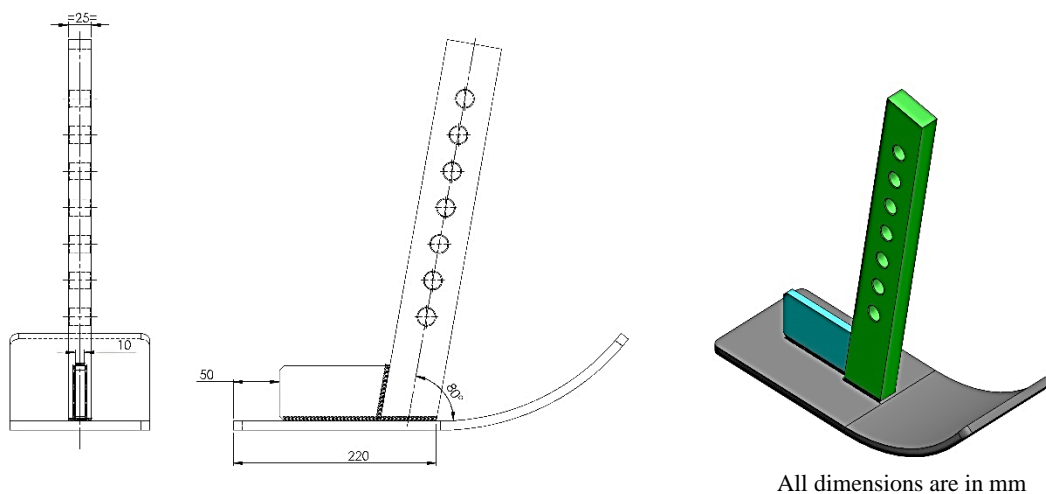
CAD drawing of depth adjuster of spading machine
